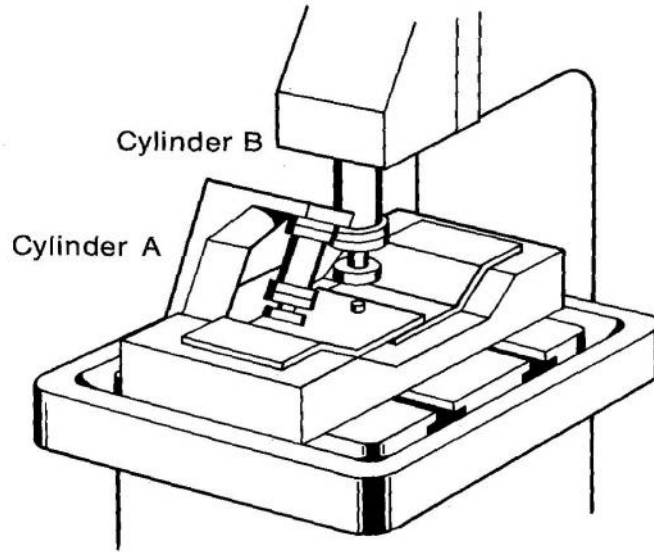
Clamping and Riveting Using Pneumatic Cylinders
